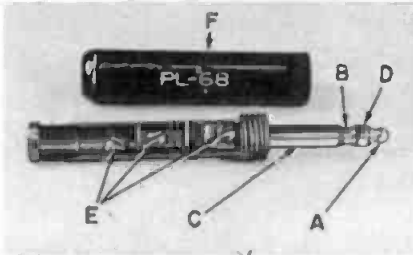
A. Interior view of a tip, ring, and sleeve cord plug: A—Tip, B—Ring, C—Sleeve, D—Spacer, E—Terminal screws, F—Insulated grip.
